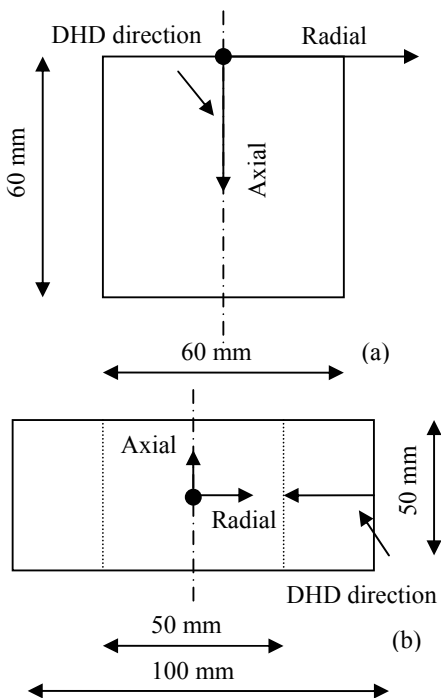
Schematic drawing of the components indicating the measurement line: (a) solid cylinders, (b) hollow cylinder.
